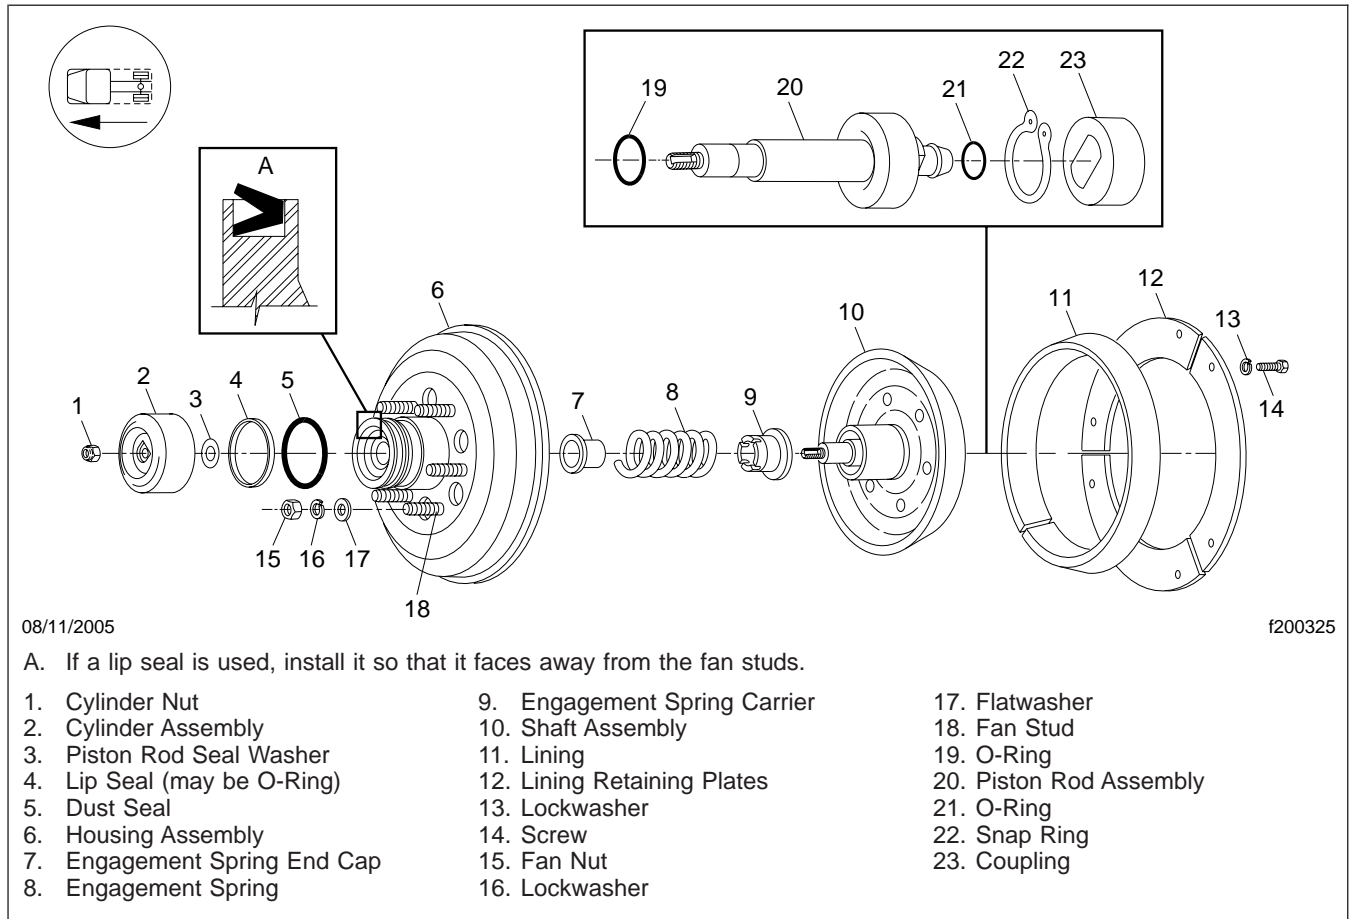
, Kysor K22RA Fan Clutch (exploded view)
